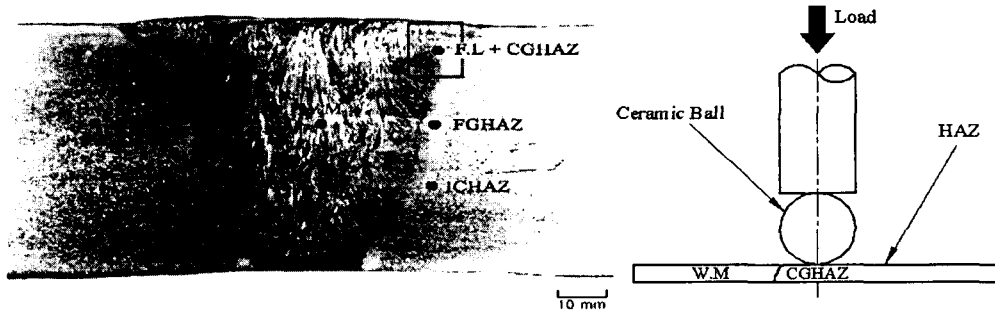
Schematic illustration for X20CrMoV121 steel weldment, machining position and loading arrangement for CGHAZ specimen
